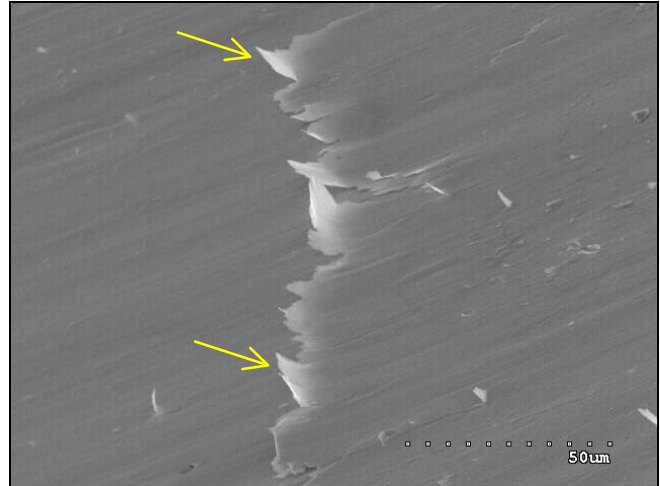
Higher magnification view of Photo 3 showing a tool mark from the machining operation. 1350X
